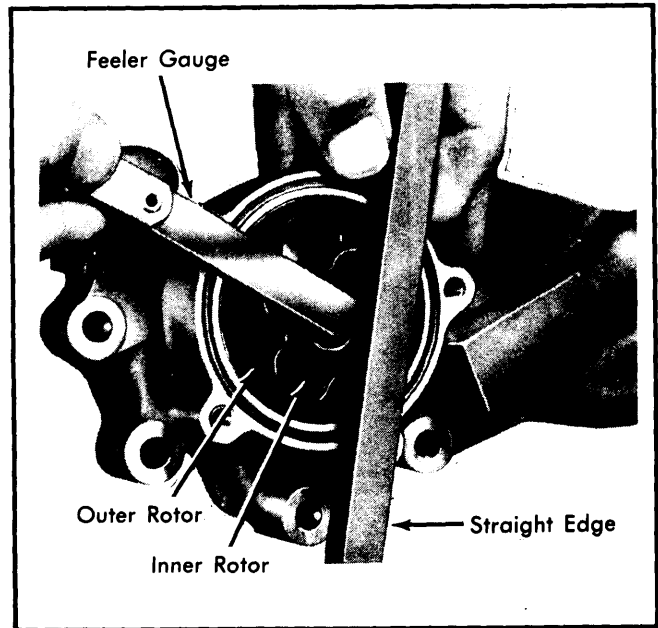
Making Rotor Clearance Measurement with Feeler Gauge and Straightedge
